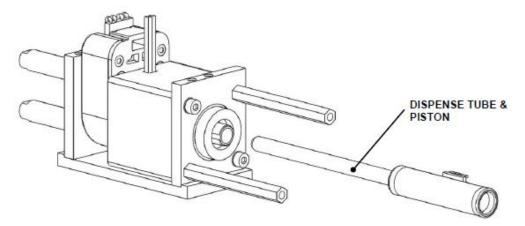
Removing the Dispense Tube on the Dispense Piston from the Barrel Center
